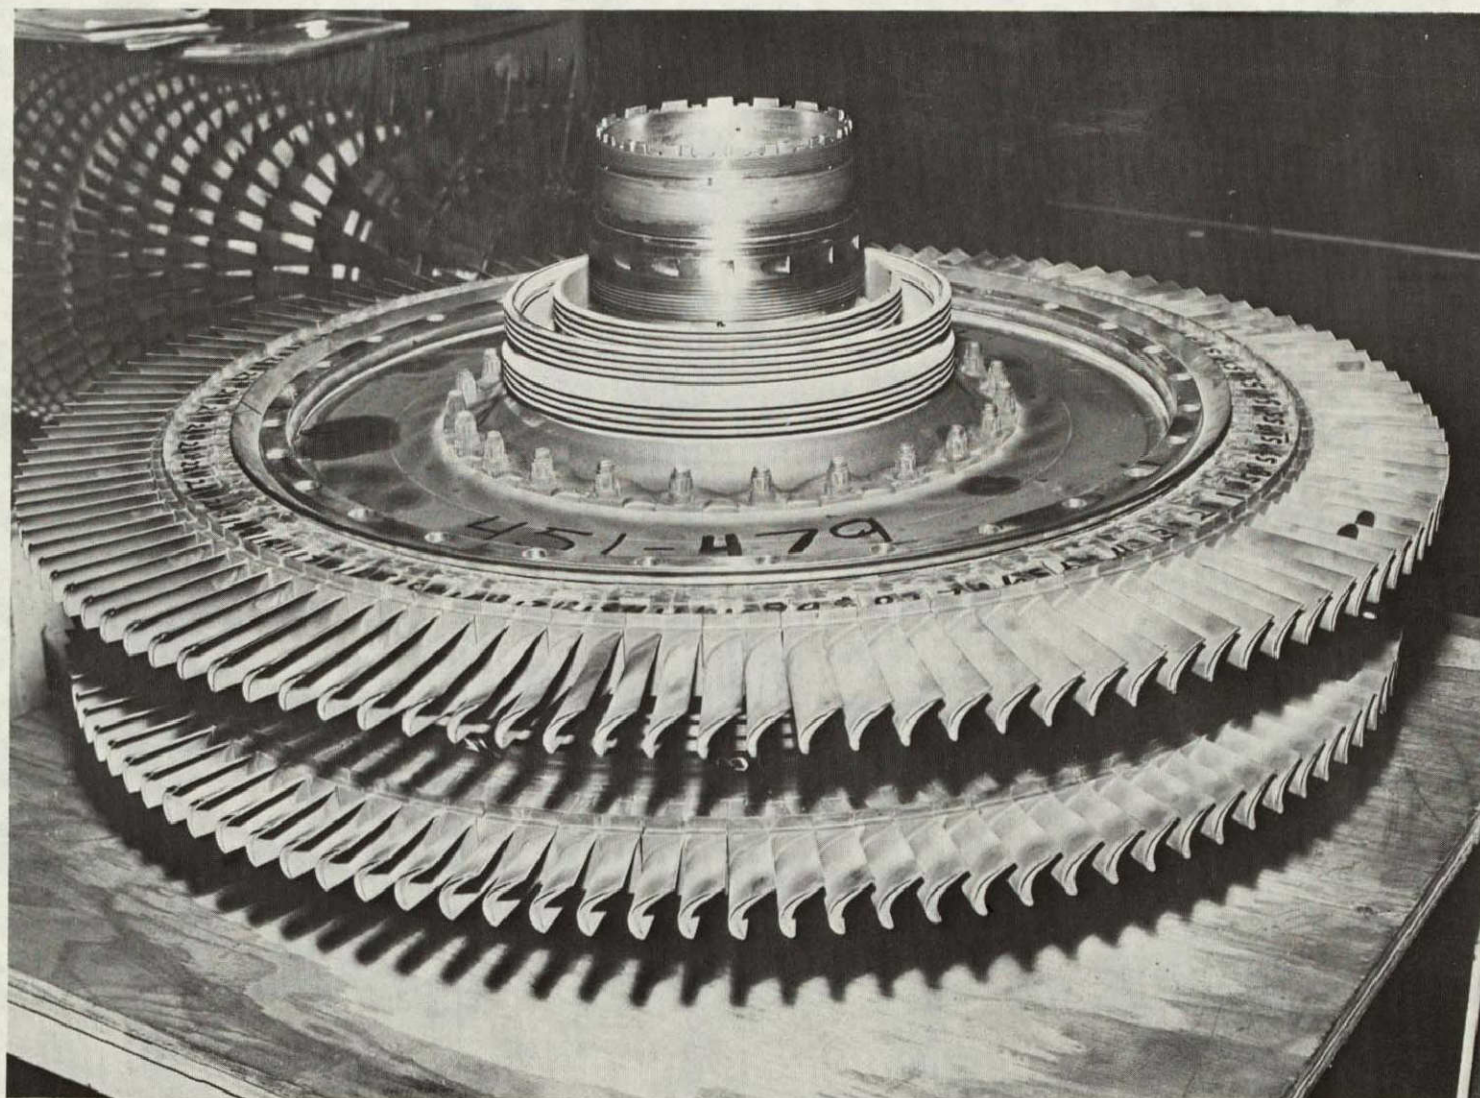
HP Turbine Rotor, Overall View of Blades.
